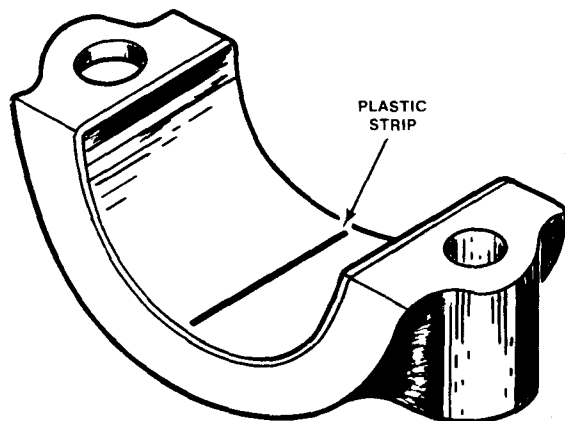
Installing Plastic Gauging Material in Bearing Insert
